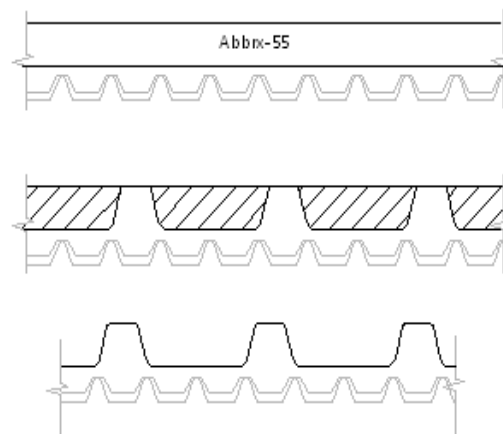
Illustration of the machining necessary to produce the custom profiled tracks
